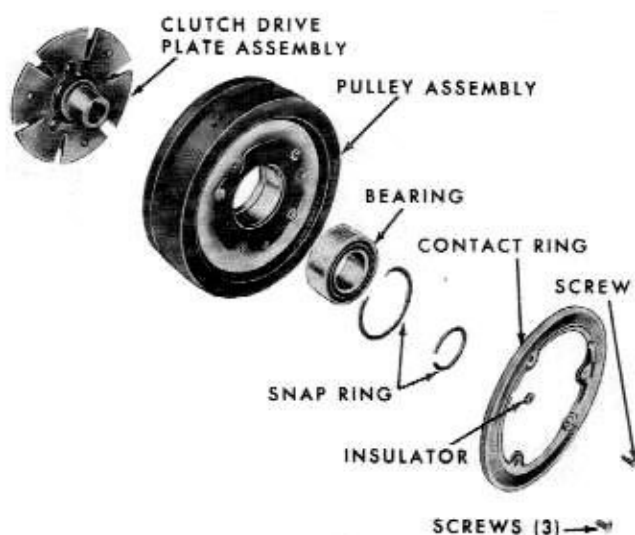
Magnetic Clutch Disassembled—Eaton
